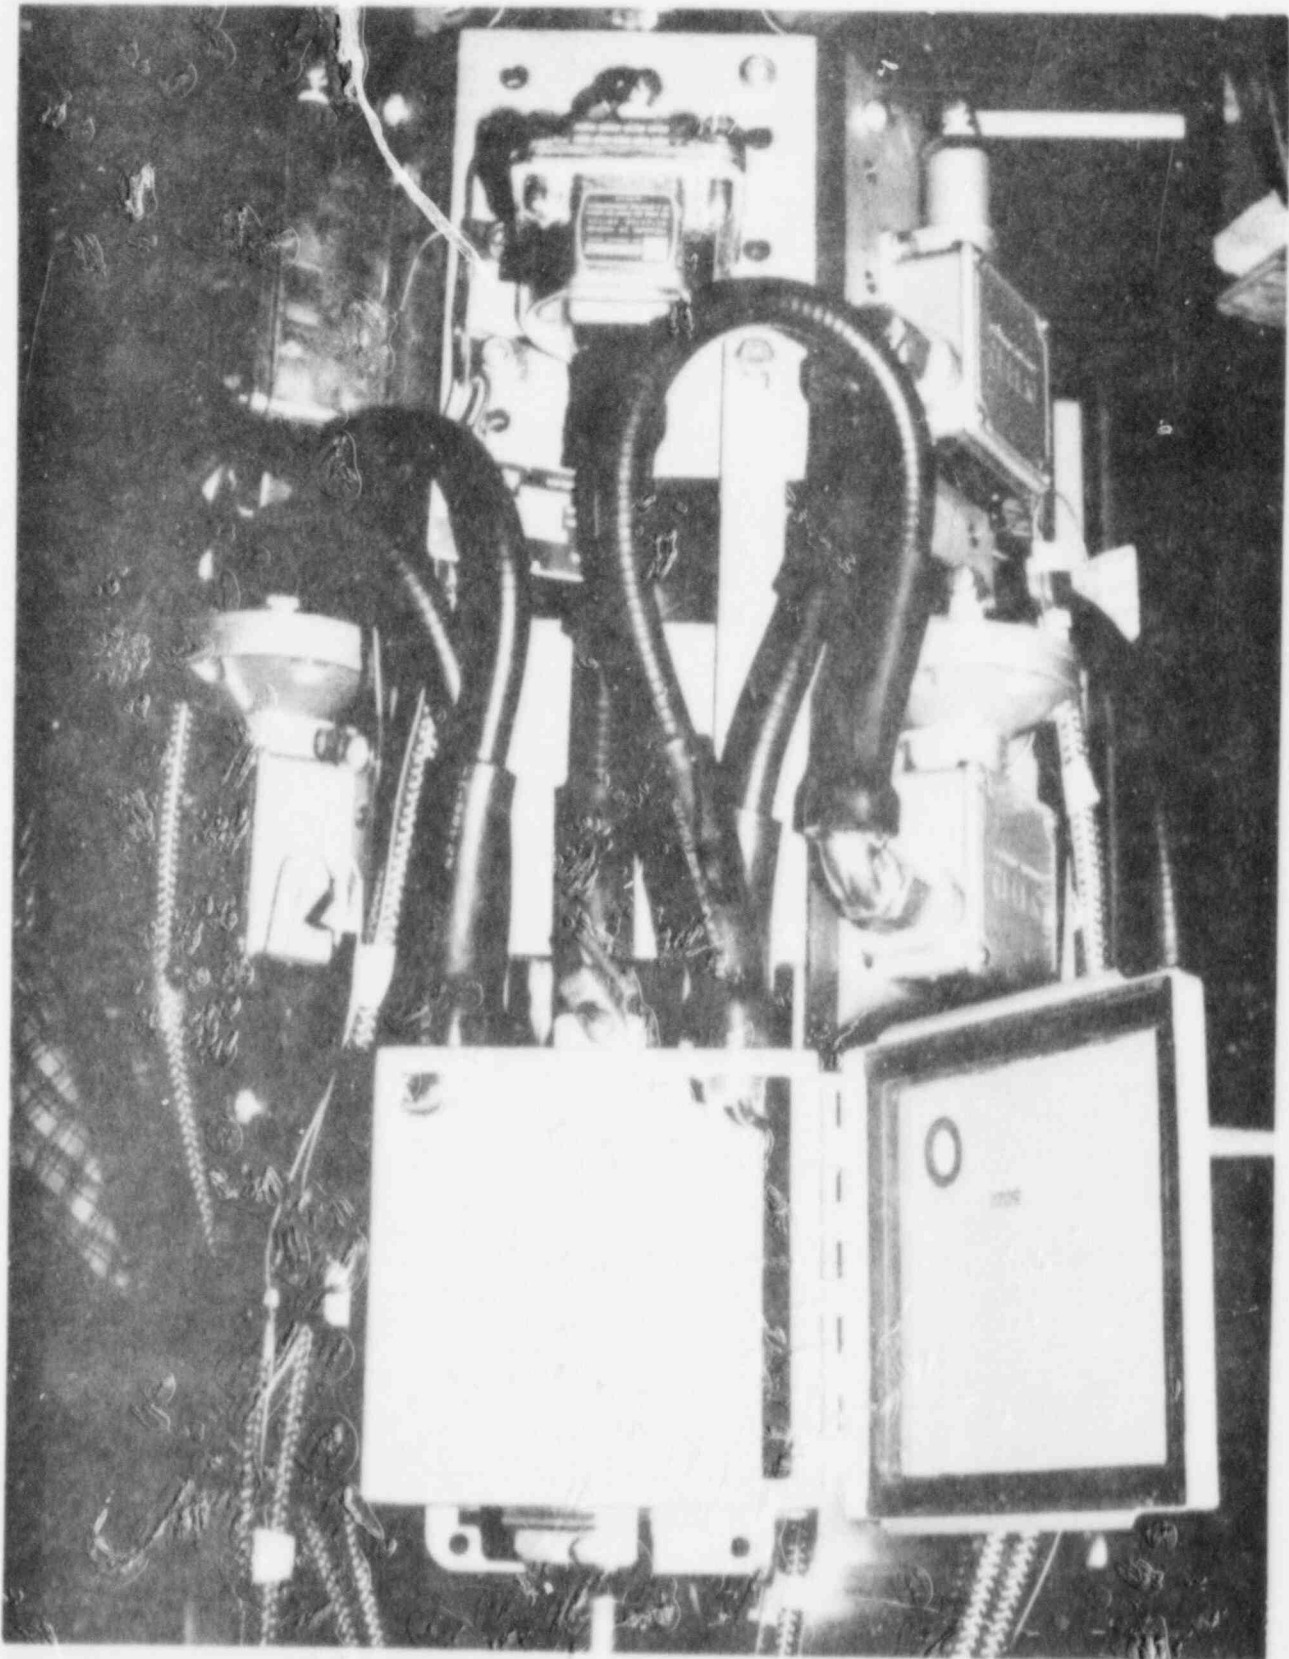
Assembly Photograph IV - Encapsulated Interconnecting Box
